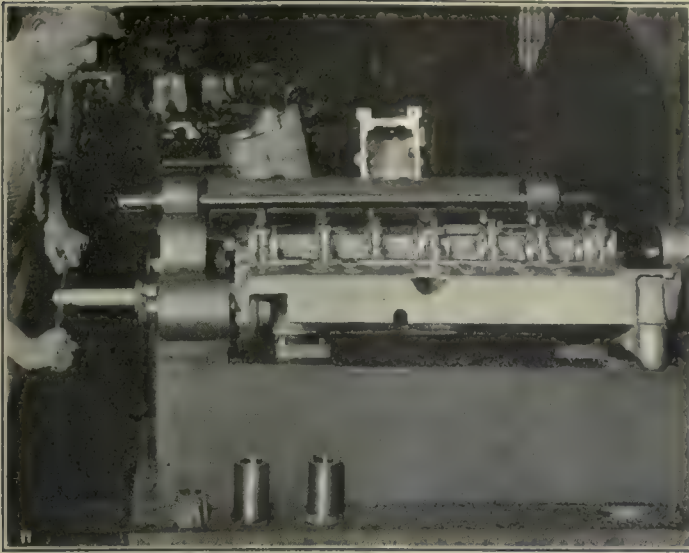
HAND-REAMING THE BEARINGS. FIG. 12—FITTING THE BEARINGS IN ASSEMBLING MOTOR
